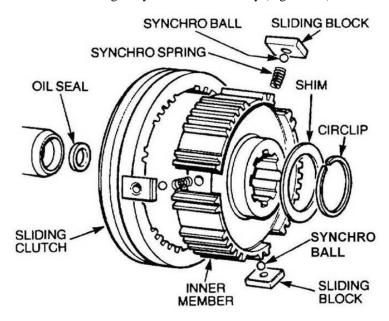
Third and Fourth Gear Synchromesh - Exploded View
